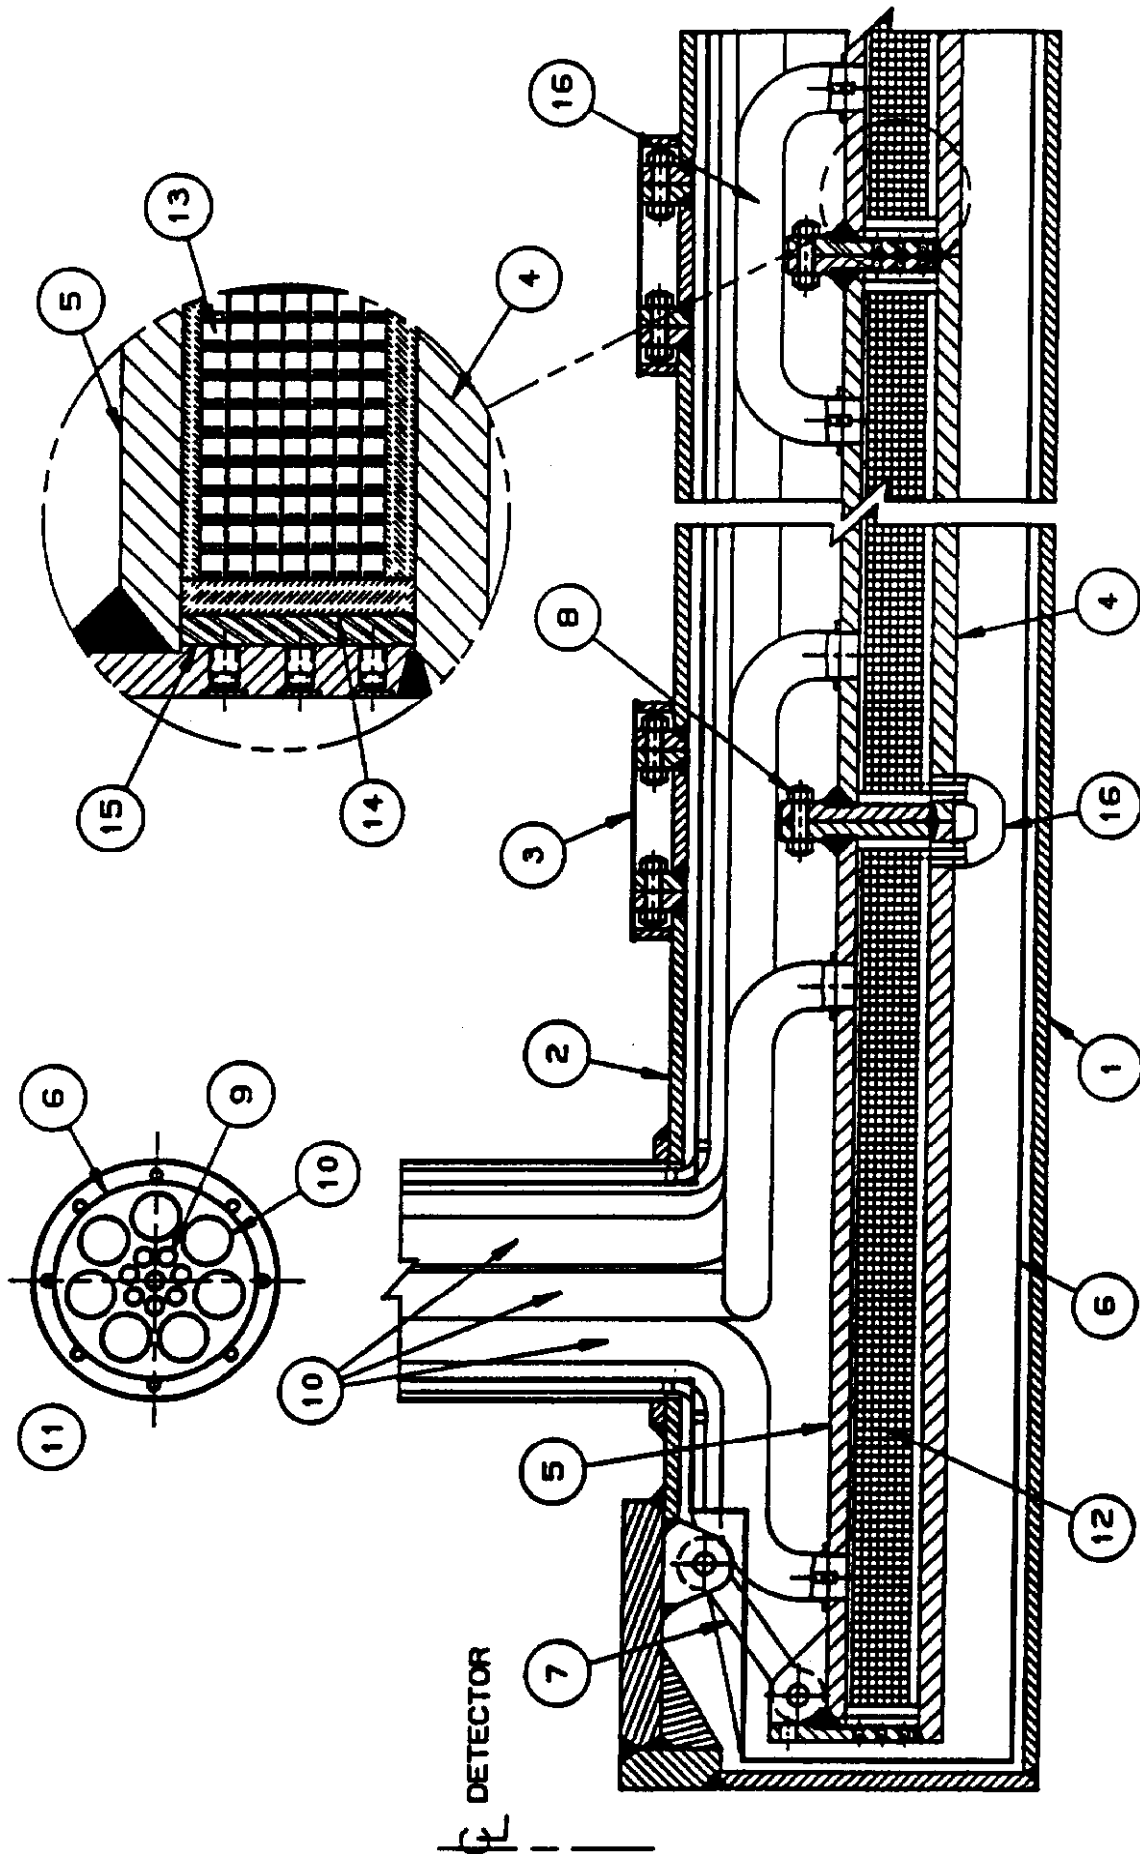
Axial cross section of coil, helium and vacuum vessels: 1, inner and 2, outer vacuum shell; 3, assembly joint (if required); 4, inner and 5, outer helium vessel shell; 6, radiation shield; 7, cold mass support; 8, coil module attachment; 9, liquid helium supply pipe; 10, helium return/vent pipe; 11, chimney to storage dewar; 12, coil winding; 13, conductor; 14, G-10 insulation; 15, axial preload bar; 16, electrical interconnect pipe.
